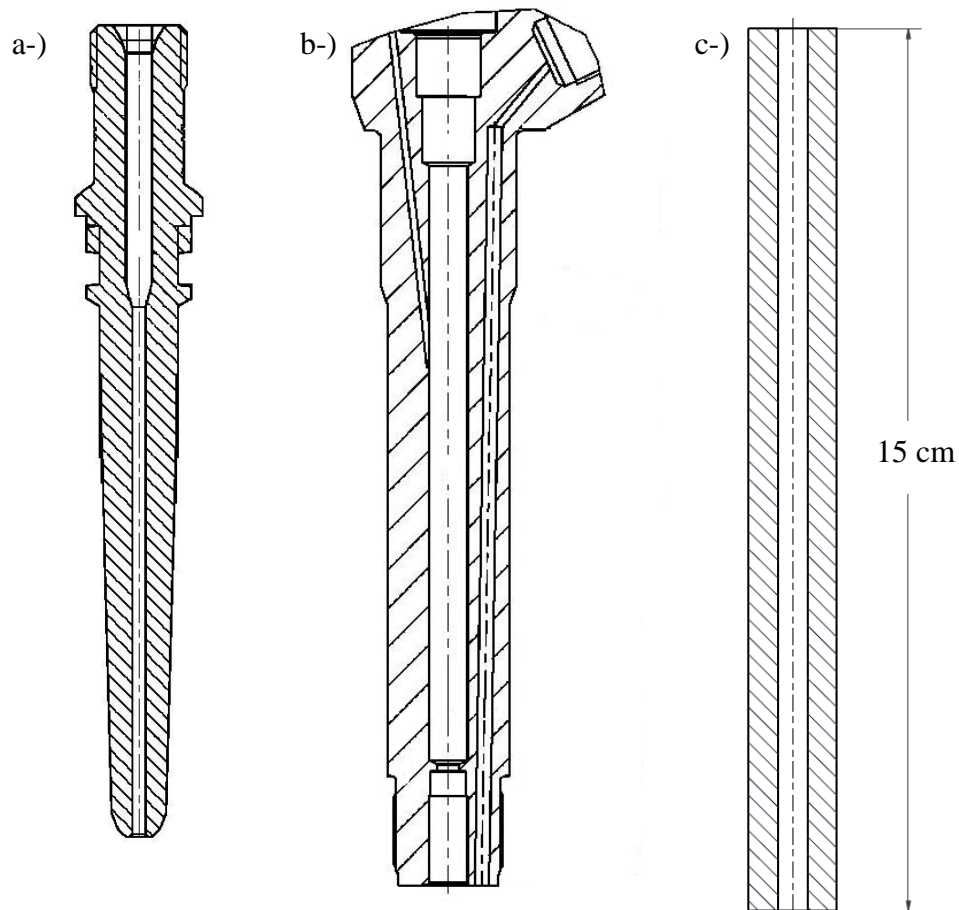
Experimental specimen geometries a) High pressure connector, b) CR-injector, c) Through hole specimen
